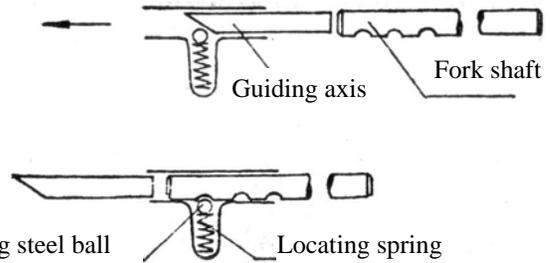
Install shift fork shaft by the guide of guiding axle
